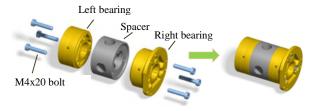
Exploded view; bearing cartridge consisting of two bearings
